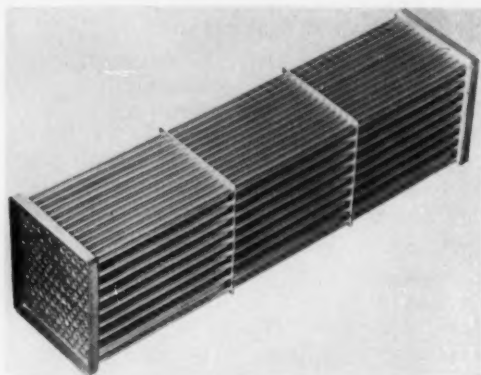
Intricate aluminum assembly of many components dip brazed in a single operation.
